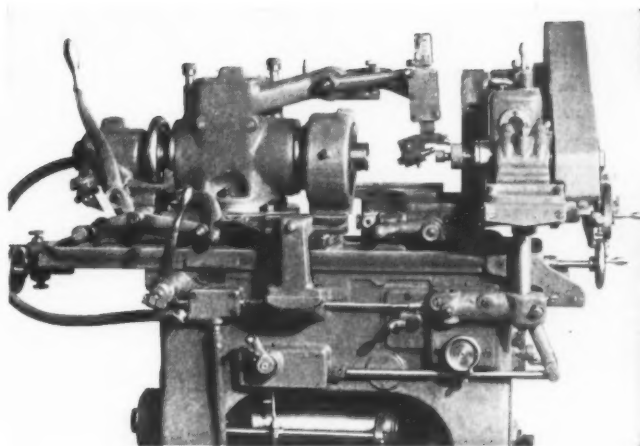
Attachment for Dressing the Two Grinding Wheels in Fig. 3, Shown in Operating Position. In Fig. 3 the Attachment is Shown Folded Back
